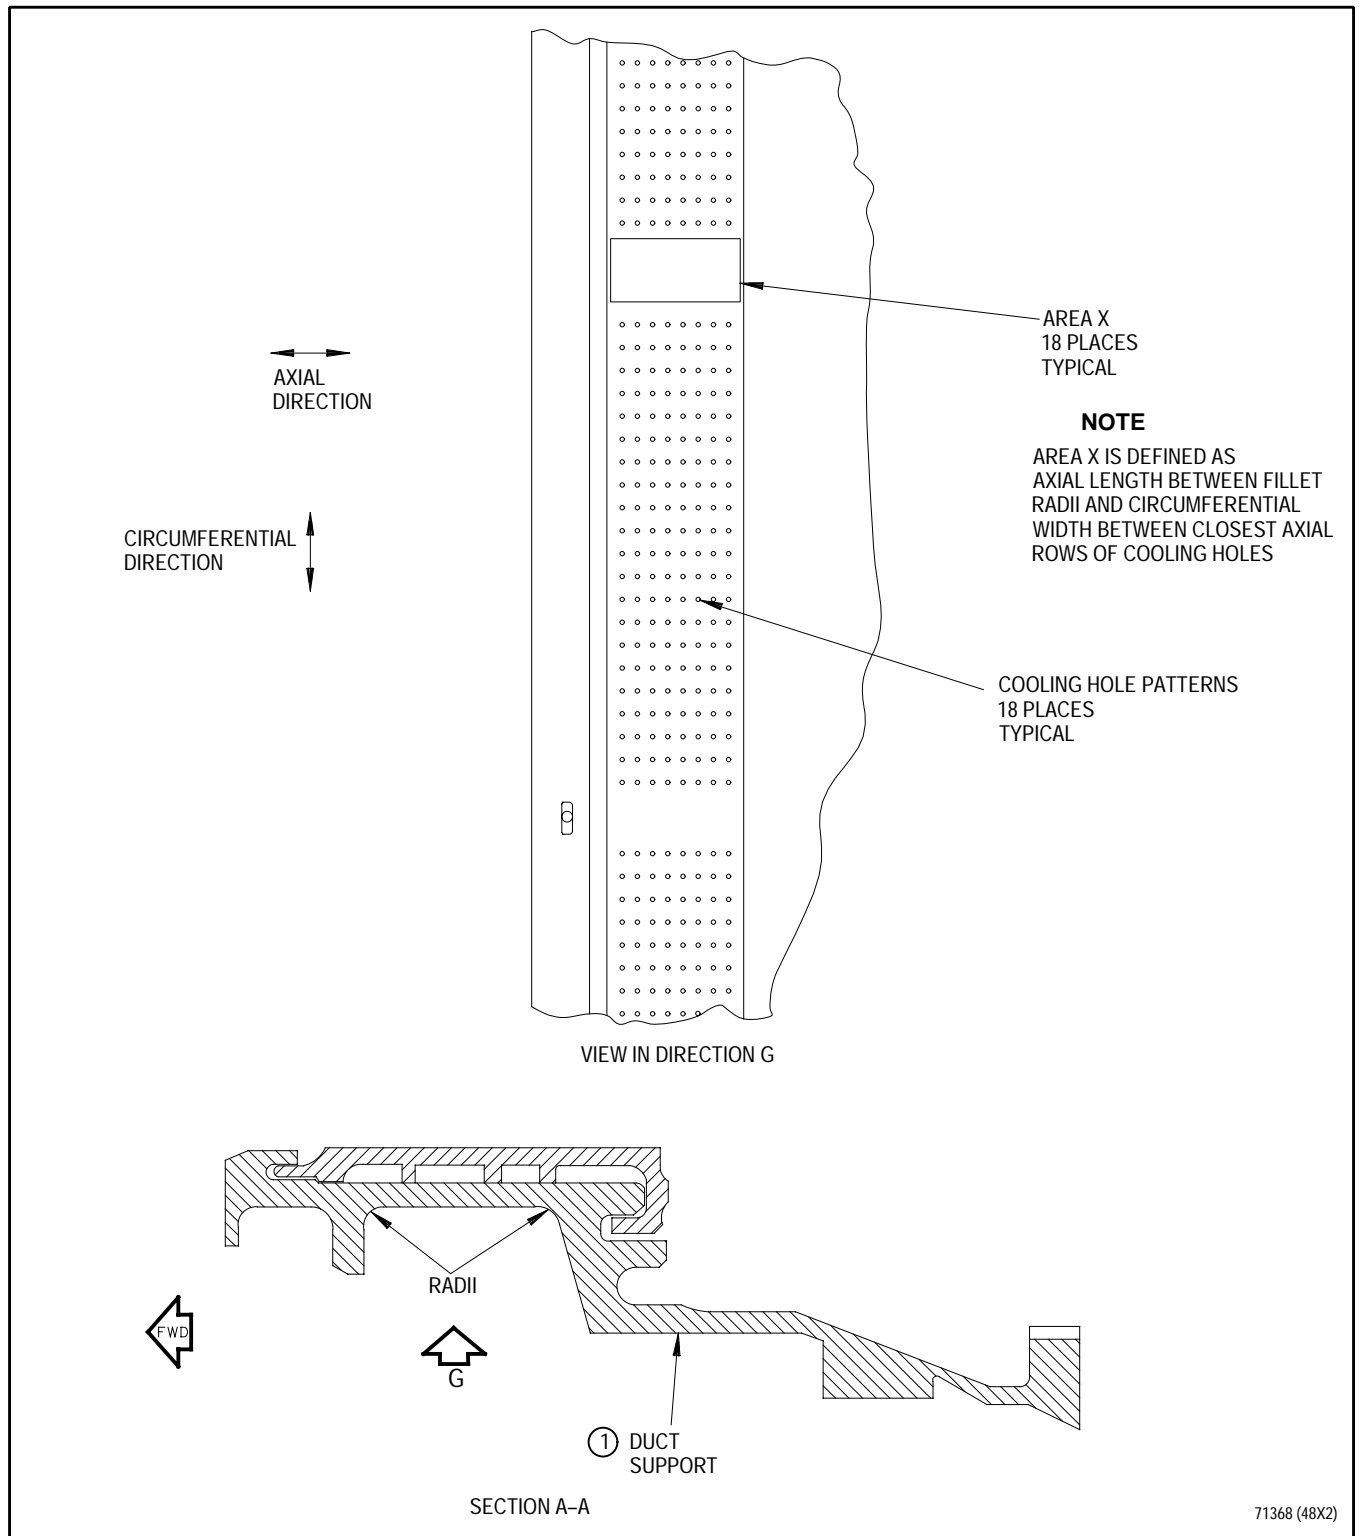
First Stage Turbine Duct and Support Set - Inspection (Sheet 2 of 2)
